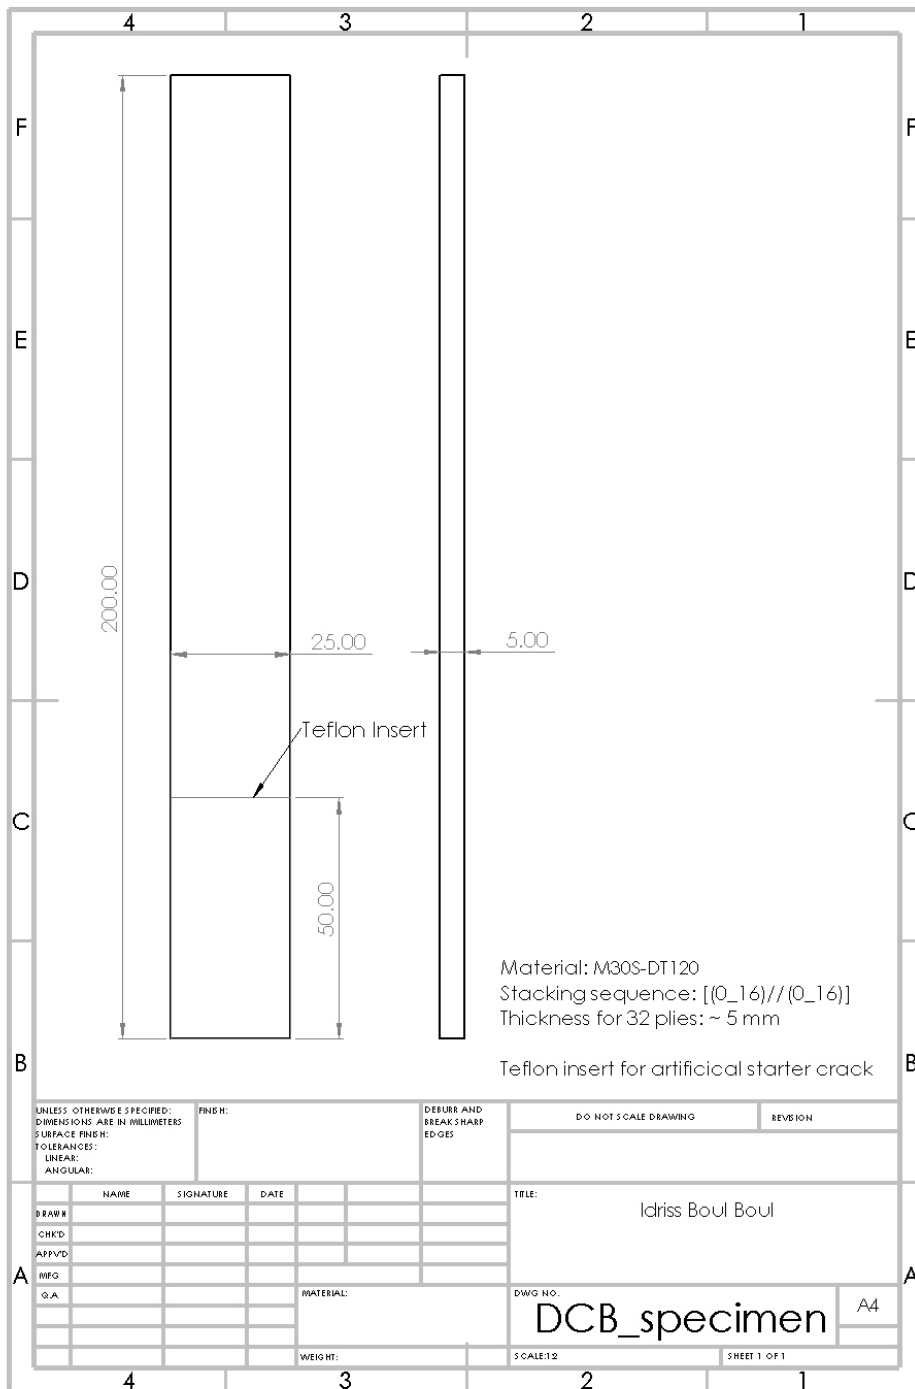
SOLIDWORKS engineering drawing of a DCB composite specimen.
